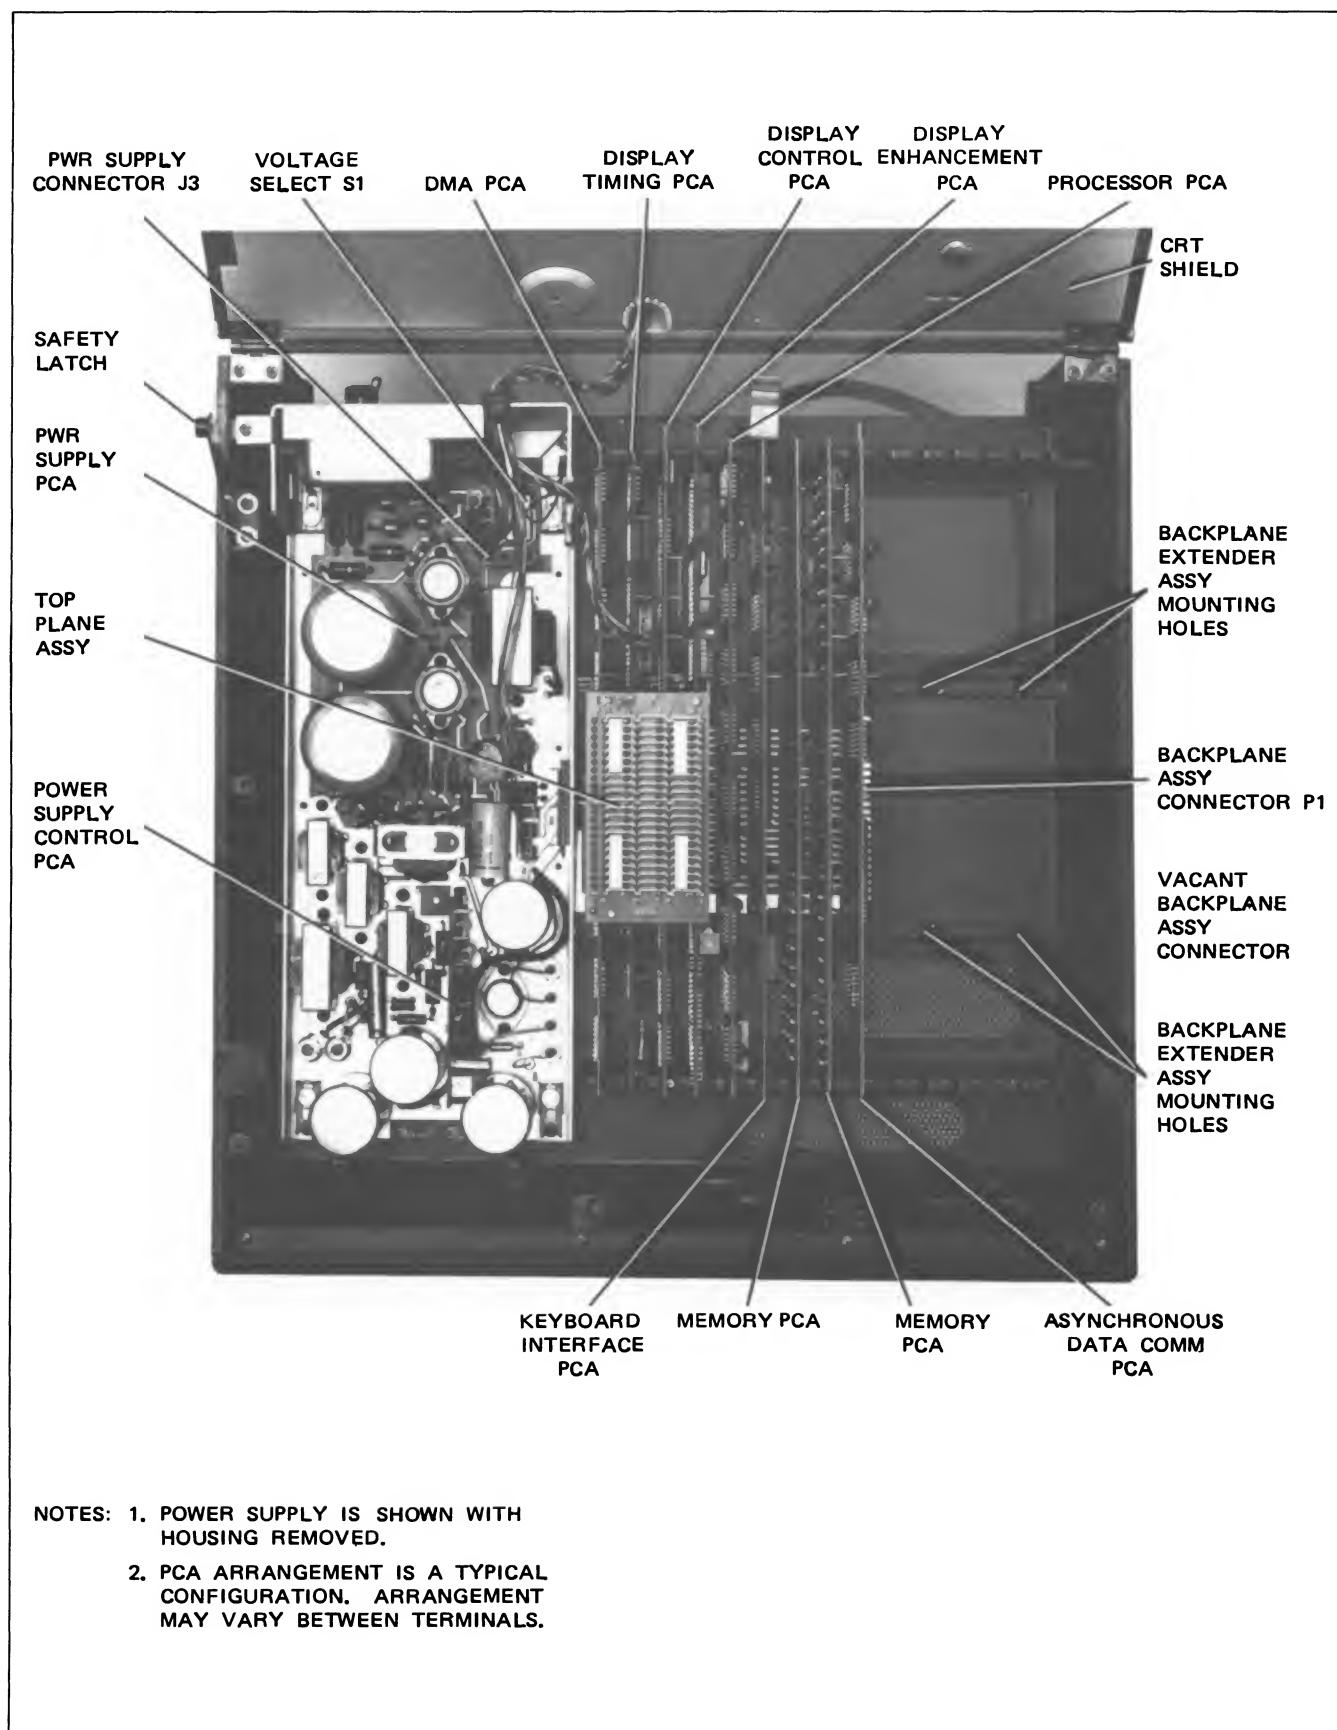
Mainframe Bottom Parts Locations (Sheet 2 of 2)
